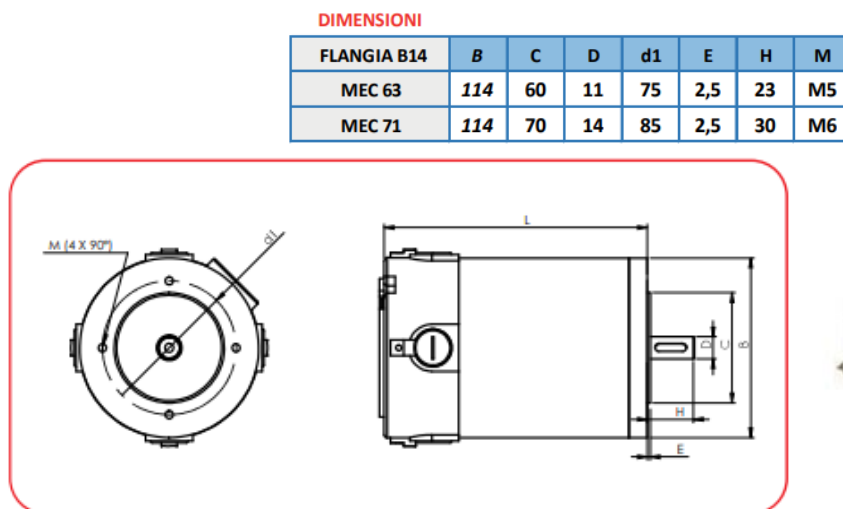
CAD drawing and general dimensions of the SERIE E motor
